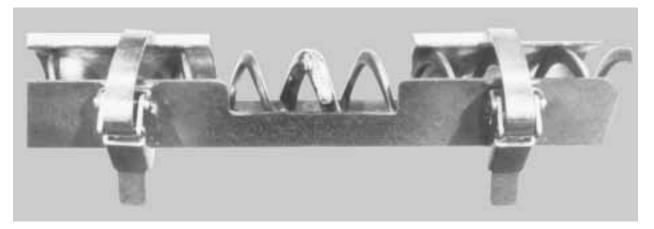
Clamping Auger in Place Using a Brazing Clamp
